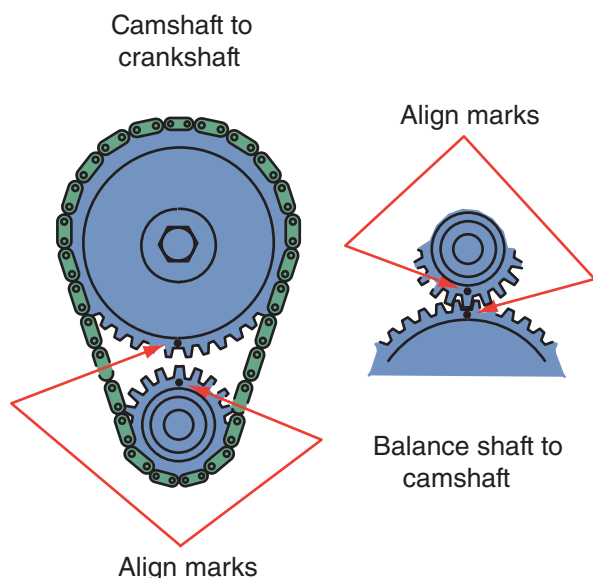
Camshaft-to-crankshaft and camshaft-to-balance shaft timing marks.
